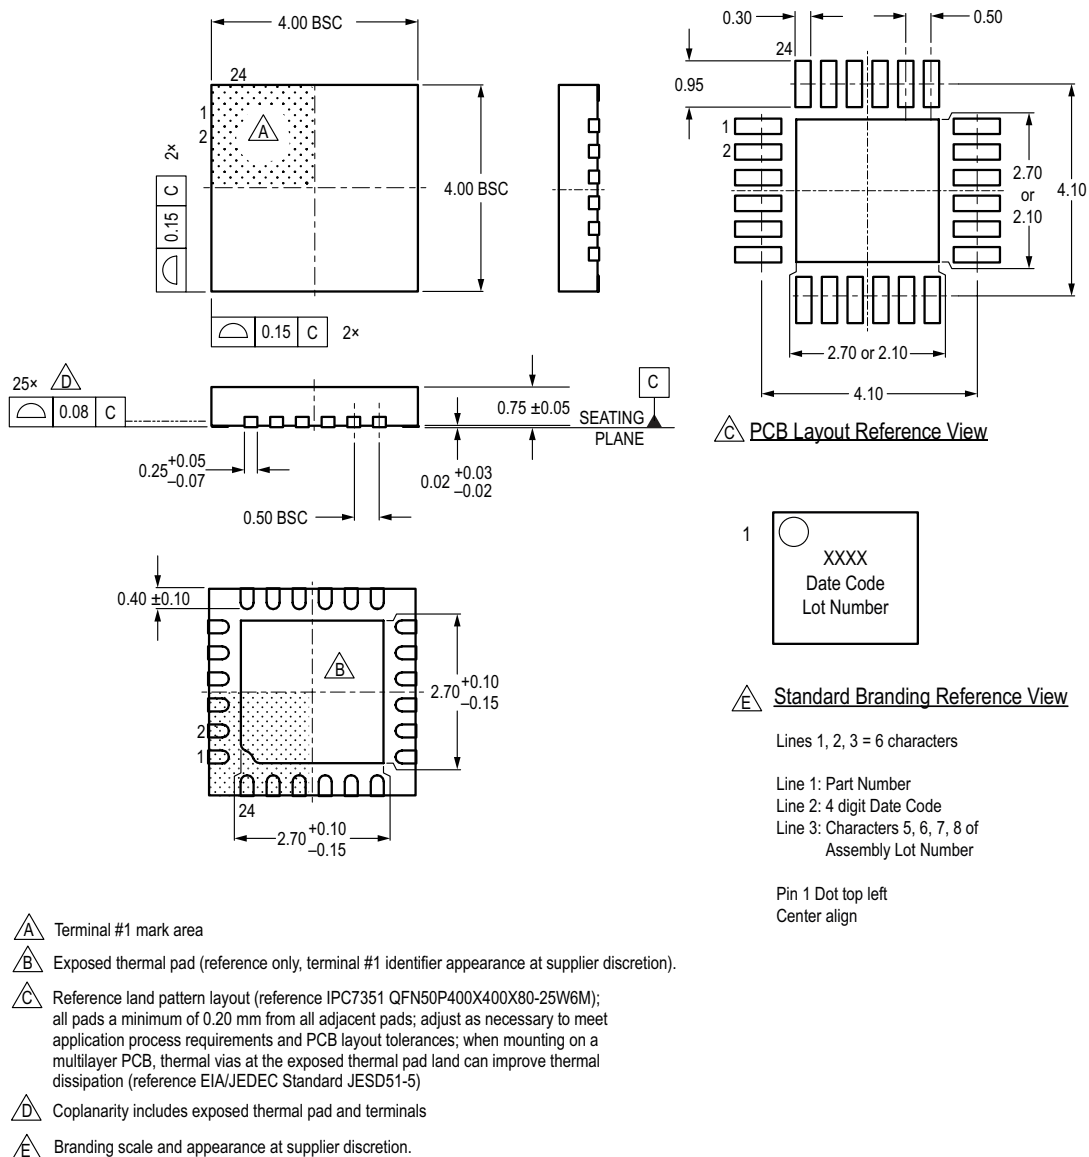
ES Package, 24-Pin QFN with Exposed Thermal Pad
